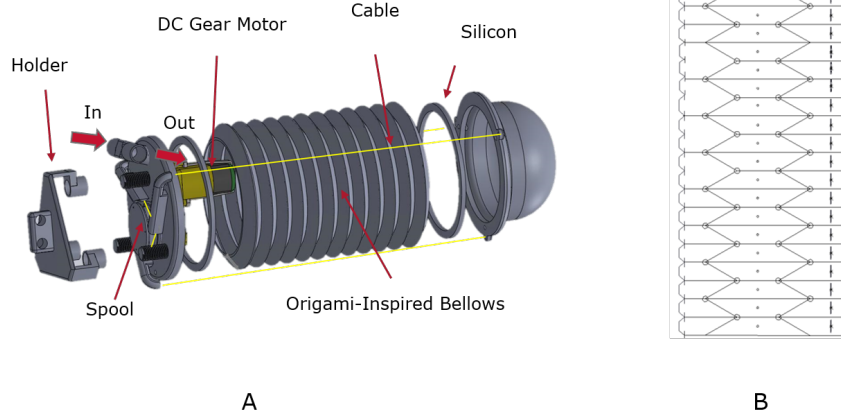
CAD Design of Ventilators. (A) CAD model of ventilator. The rigid parts per printed out of PLA (B) Origami two-dimensional pattern cut using a laser cutter.
